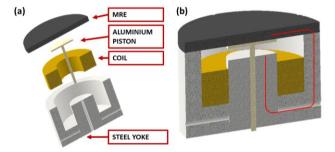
Proposed MRE actuator design (a) exploded view, and (b) sectional view.
